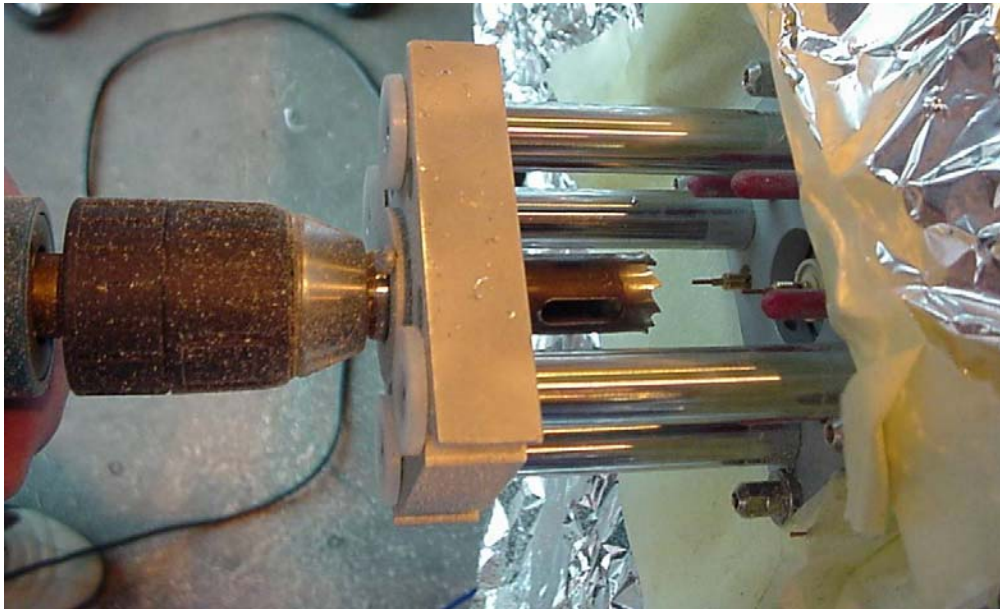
A picture taken during wire extraction. The cup mill and the structure guiding the drill are shown.
